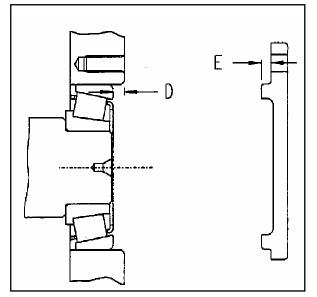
Dimensions Required for Shimming Gear Shaft Bearings
